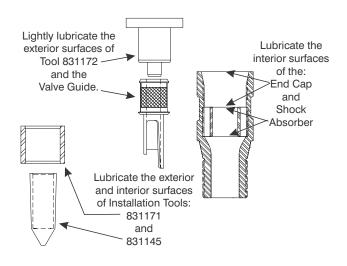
Lubricate Valve Guide, Shock Absorber and Installation Tools.
